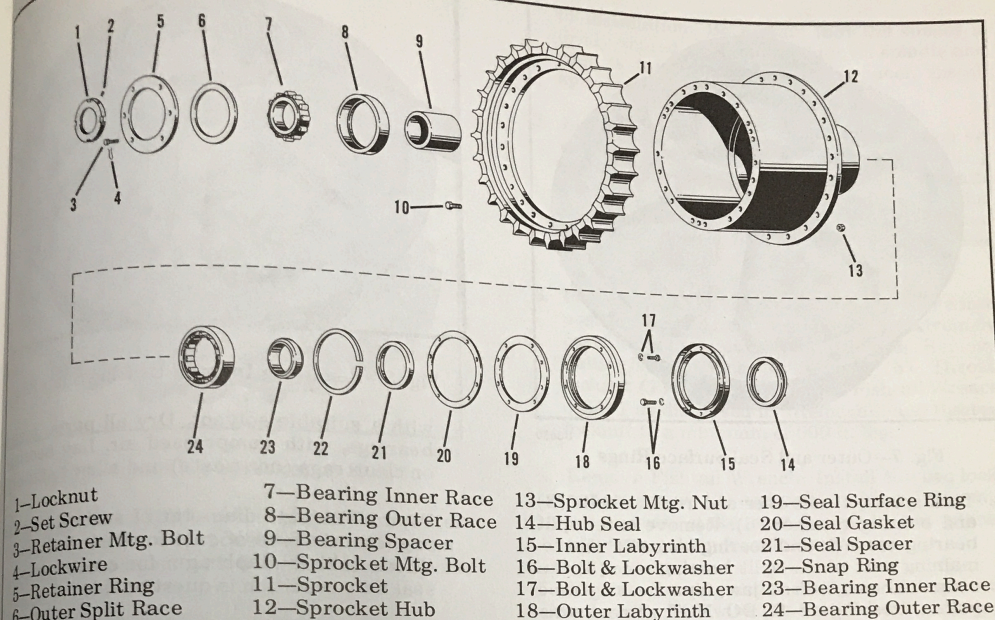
Exploded View of Sprocket Hub and Sprocket
